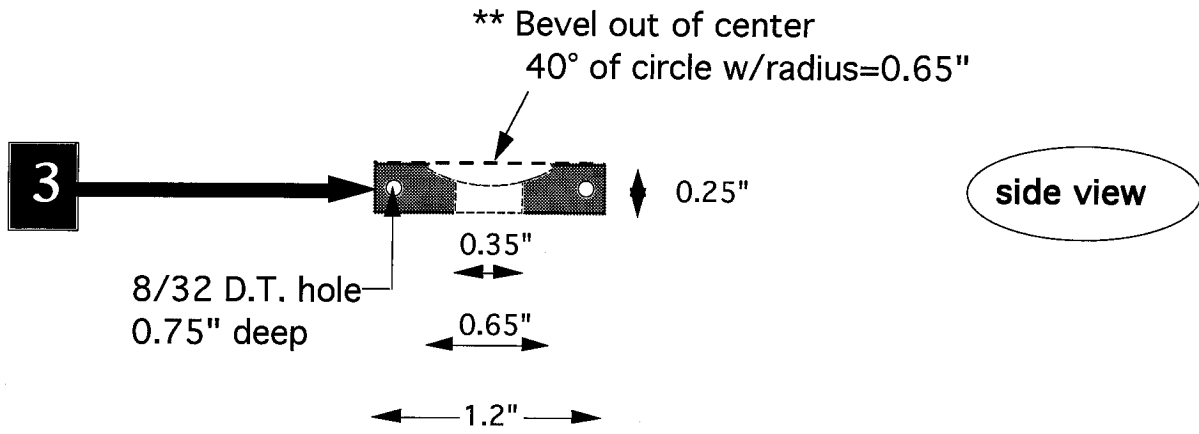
Design drawings for component parts 1 for the shear cell.
